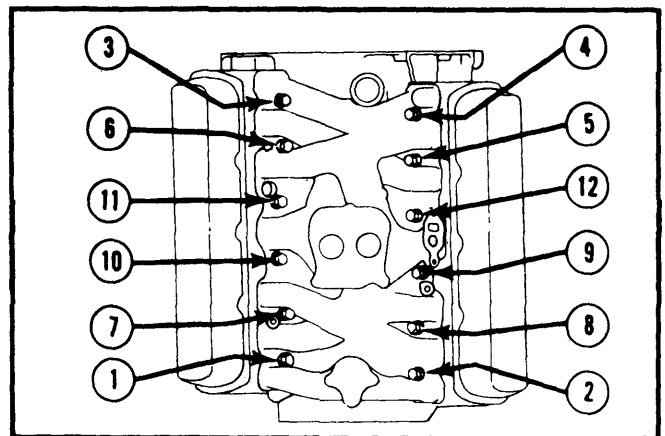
Intake Manifold Tightening Sequence 350" V8 Gas and Diesel
